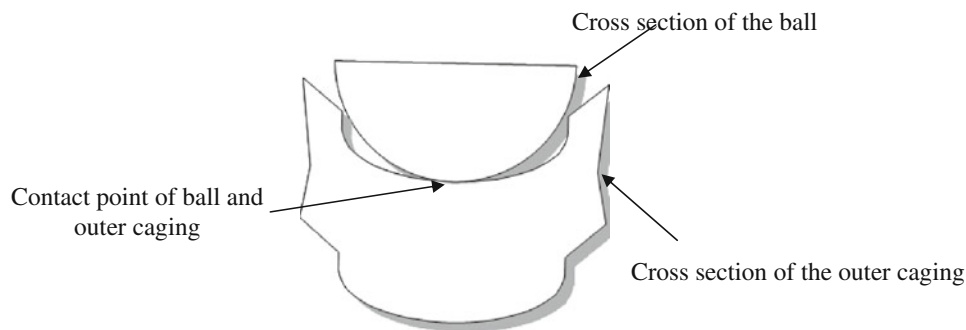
Cross-section of the ball the bearing showing ball and the outer caging
